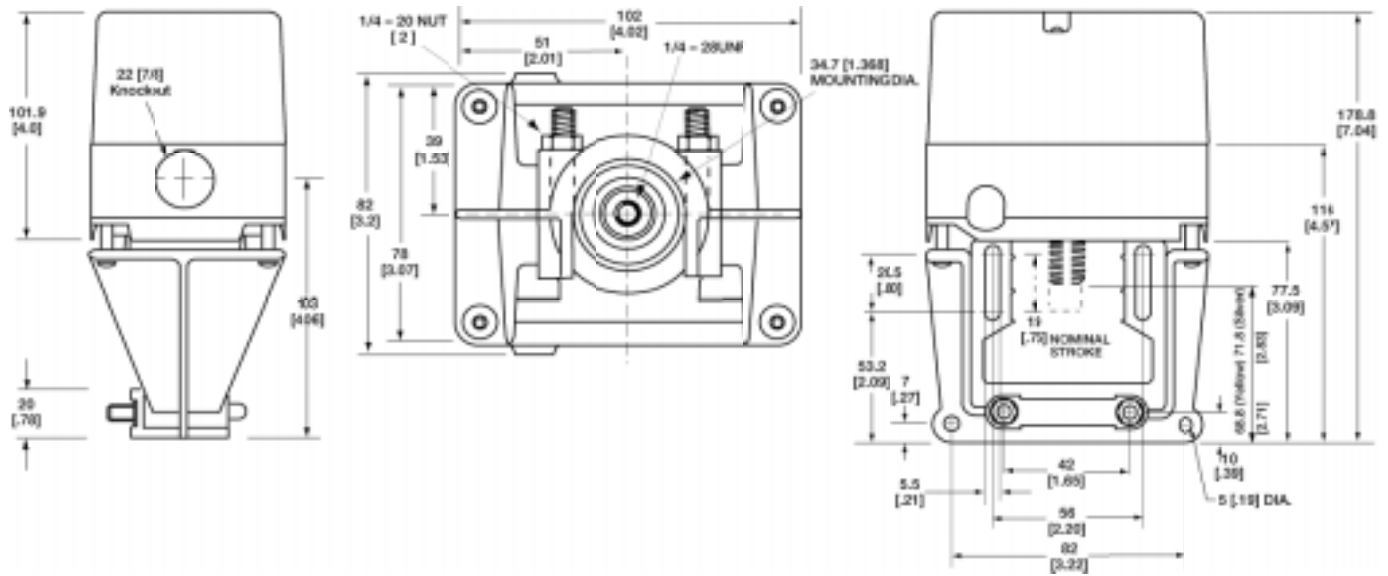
DIMENSIONS OF ML7984 VALVE ACTUATOR IN MM (INCHES).
